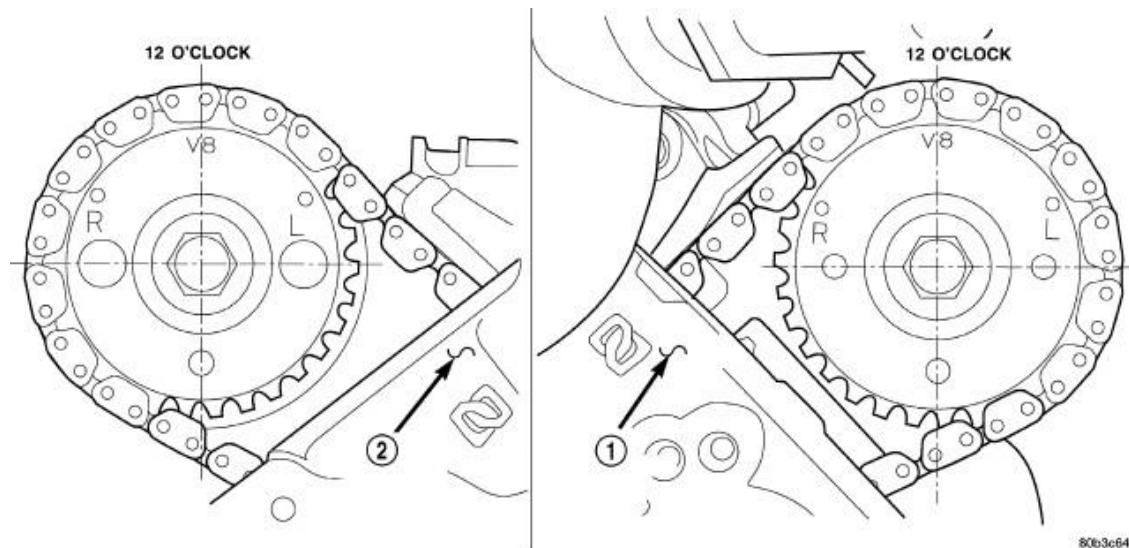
V8 Timing Mark On Camshaft Sprocket
